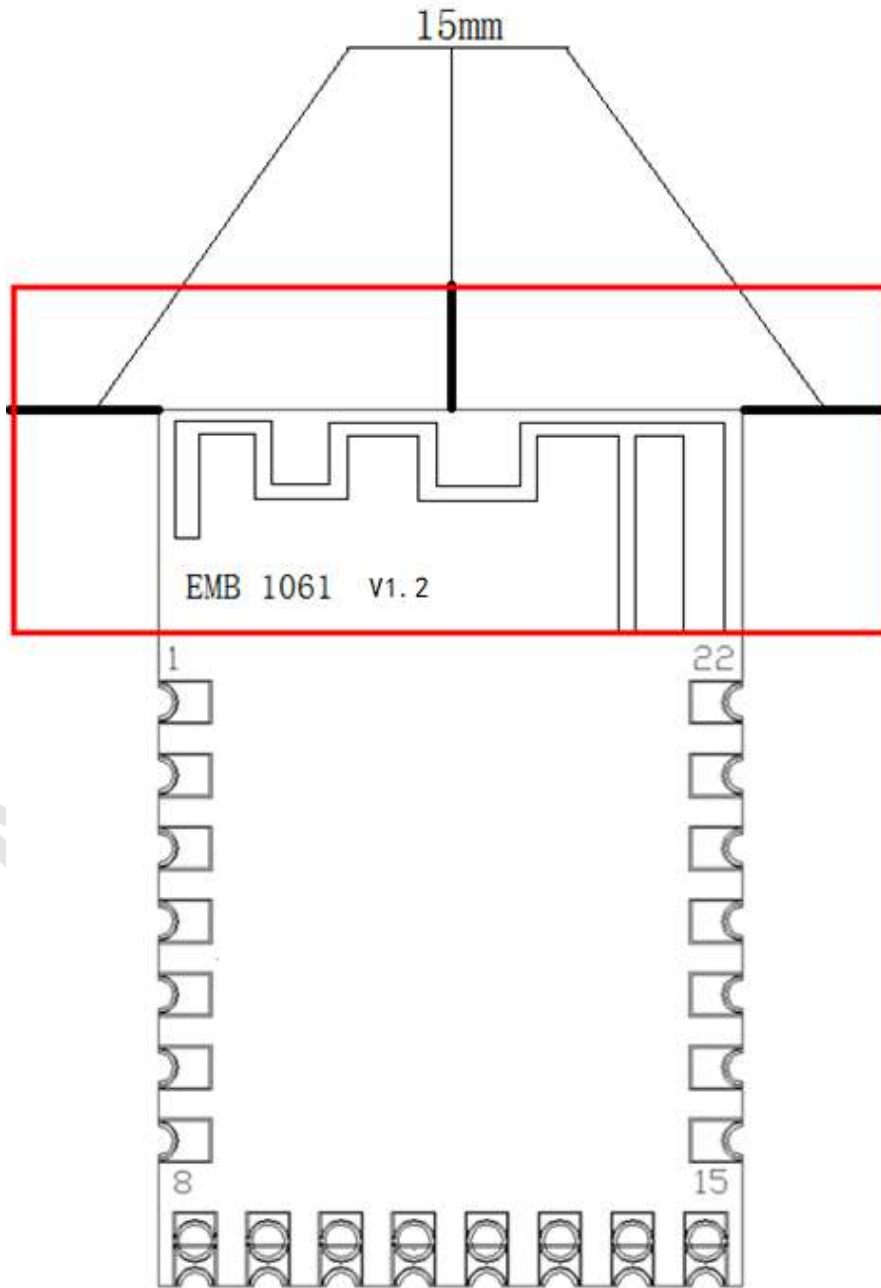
Minimum Clearance Zone of PCB Antenna (Unit: mm)
